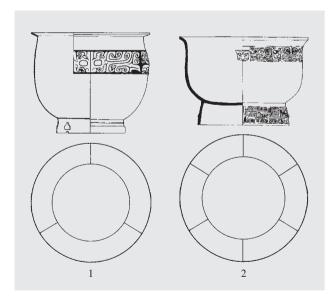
The handleless *gui* and their piece-mold assembly patterns.
